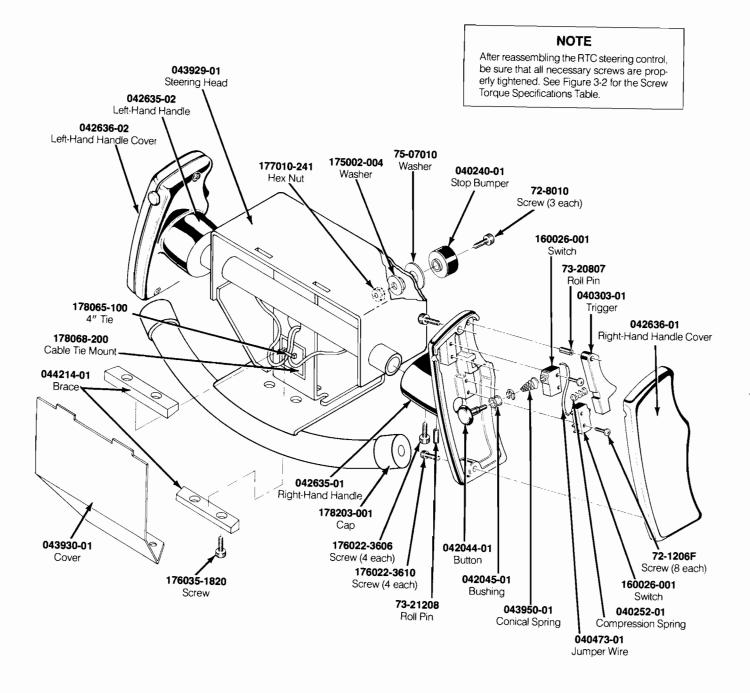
RTC Steering Control Assembly A043968-01 D
